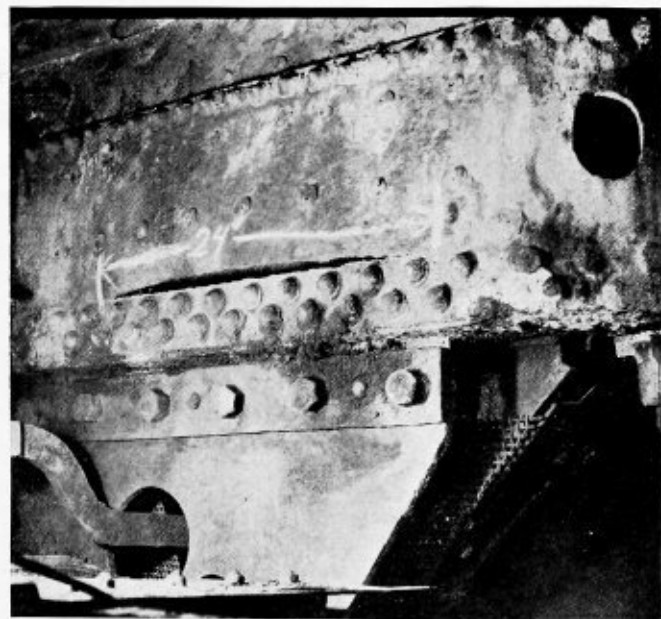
Opening in Door Sheet Caused by Failure of Staybolts
